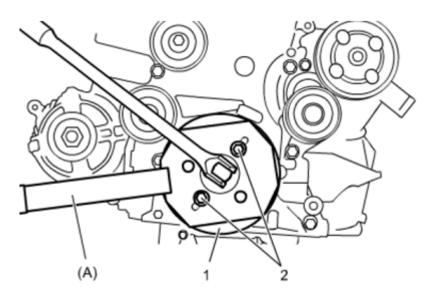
Removing Crankshaft Pulley Bolt Courtesy of SUZUKI OF AMERICA CORP.
